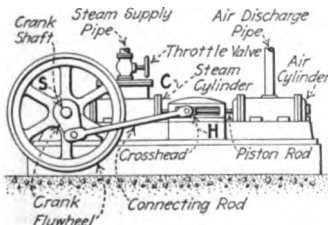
A double-connecting-rod, back-acting crank-mechanism as applied to air compressors.
